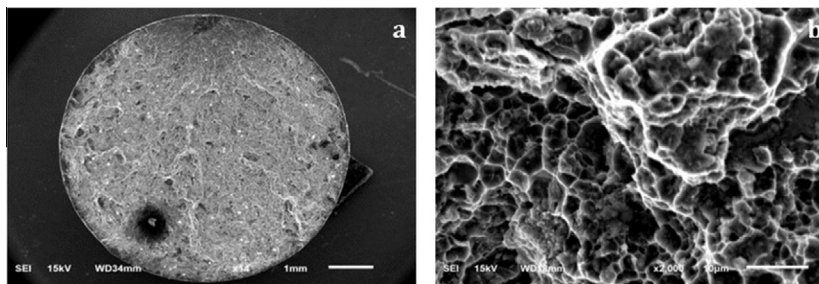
Fatigue tested composite-2 (a) fractured surface, (b) crack initiation site.
